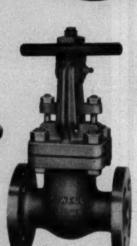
300-pound Cast Steel Gate Valve. Flange ends outside screw rising stem, bolted flanged yoke and tapered solid wedge.
